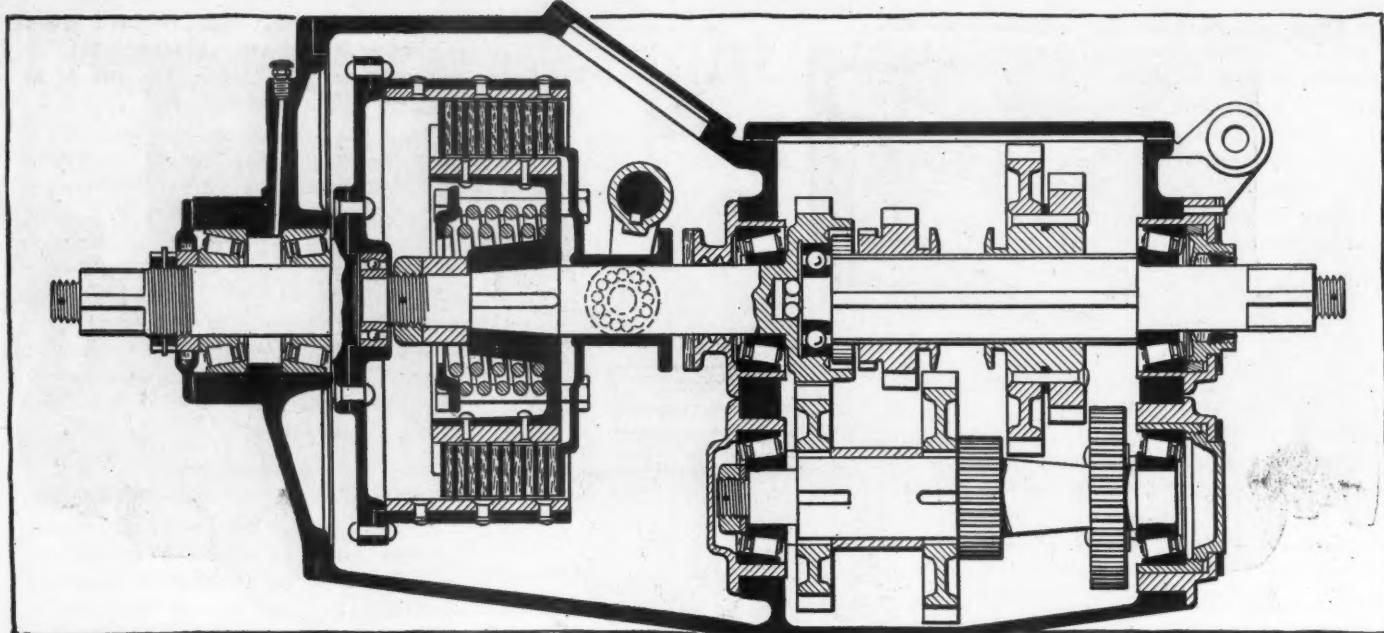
CLUTCH AND GEARSET ASSEMBLY OF EDWARDS-KNIGHT CAR
